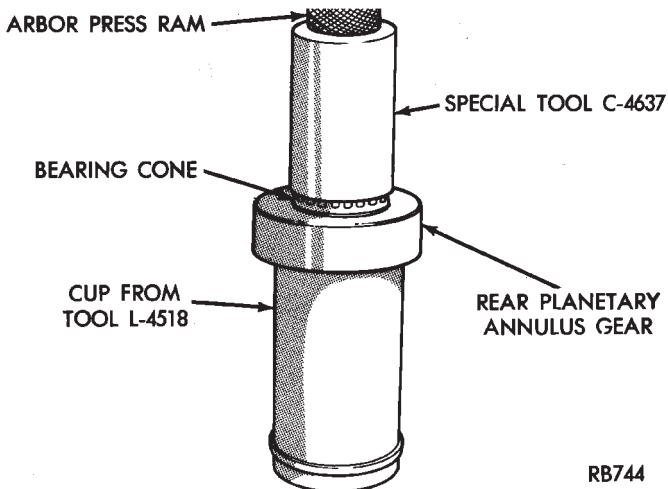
Install Rear Planetary Annulus Gear Bearing Cone
